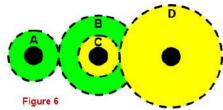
represents the two simple gear trains above with gears B and C sharing the same shaft. Gear A is the driver.
